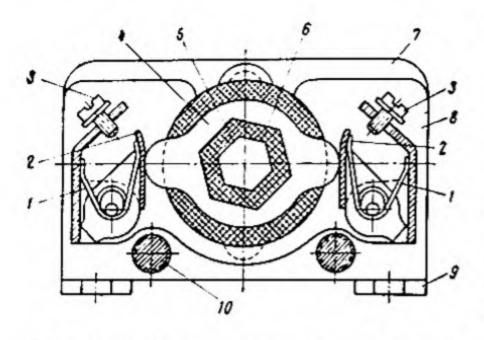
Section through one circuit of a type KCA (KSA) auxiliary switch: 1-spring, 2-stationary contact, 3-ter-minal screw, 4-moving contact, 5-shaft, 6-moulded-plastic washer, 7-pressedsteel case, 8-moulded-plastic separator block, 9-foot for securing the case, 10strain study for securing set of contact
